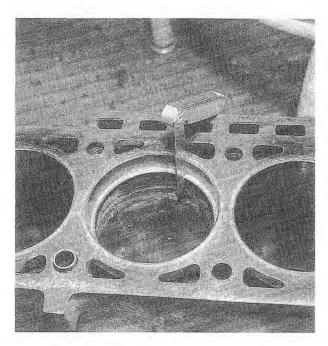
Piston ring end gap being checked in cylinder block using feeler gauge.
